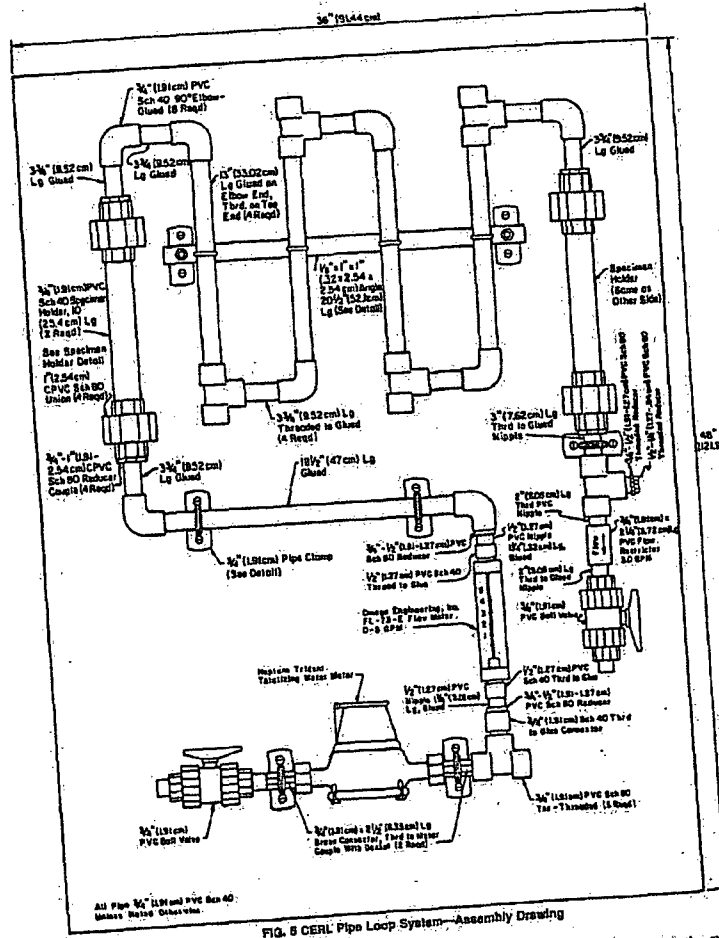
CERL Pipe Loop System—Assembly Drawing
